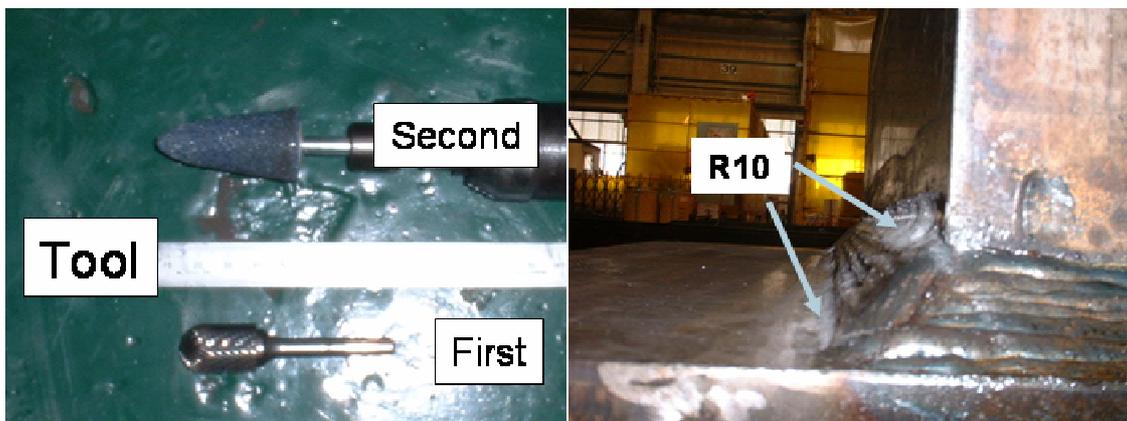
IIW recommended burr grinding, R10. Executed by Mitsui Engineering & Shipbuilding.
